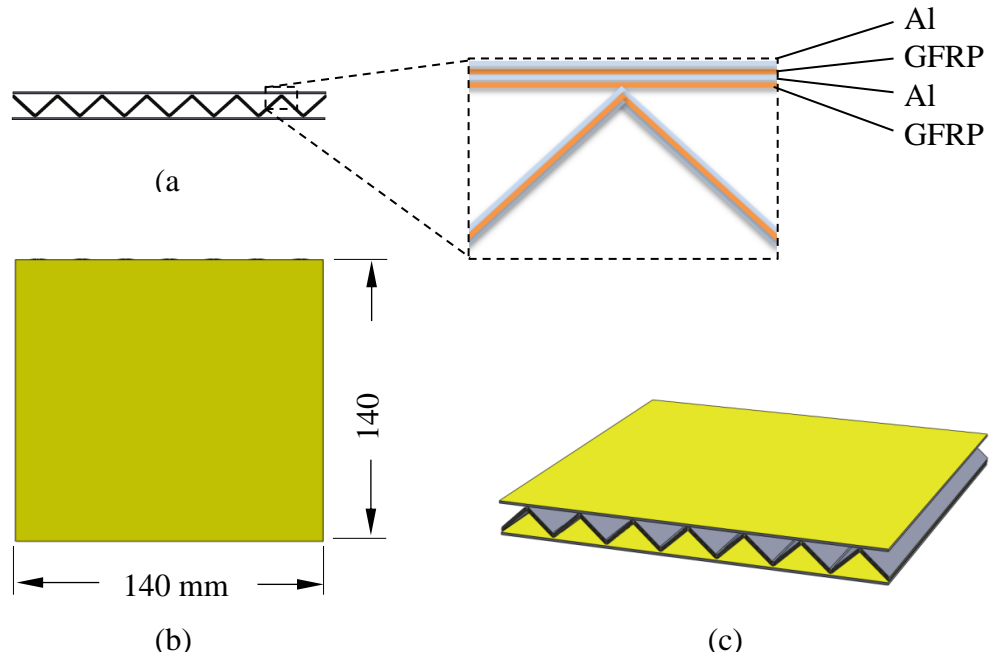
Shows schematic of the sample used for the perforation tests. (a) Front view and section details illustrating the layers of sample group CO2/SK2 using FMLs 2/2 (Al/GFRP/Al/GFRP) to be the skin and 2/1 for the core, (b) Top view and dimensions, (c) Perspective view.
